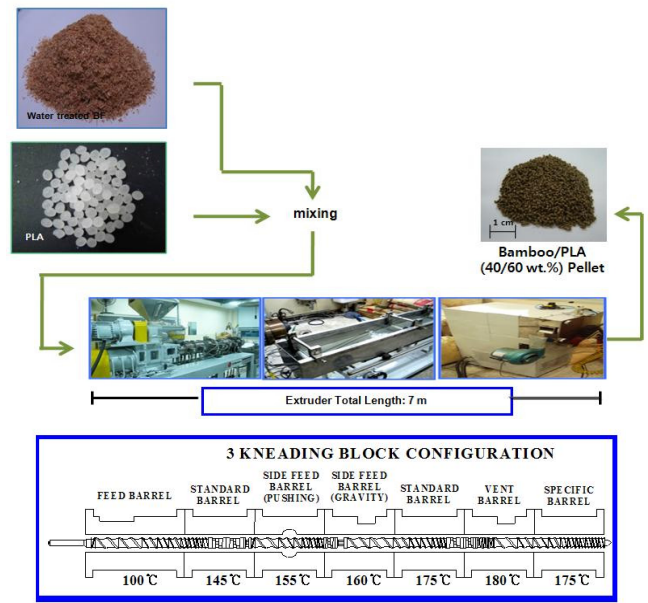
Extrusion processing for producing bamboo fiber/PLA pellets using a twin-screw extruder and three kneading block configurations.
